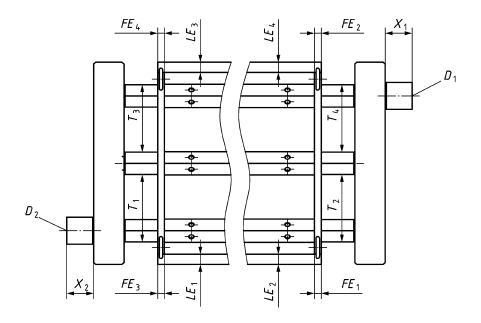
Dimensional verification for master panel 2, headers, tube register, radiant sheet
